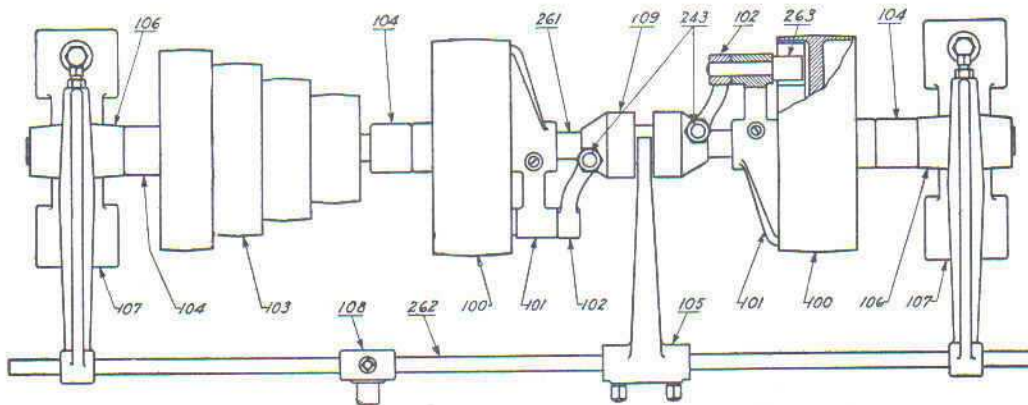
Illustration Showing Parts of Double Friction Countershaft.
